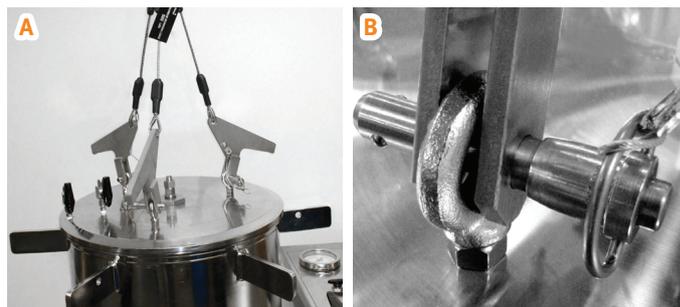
A: The pivot arms on the head sling assembly are attached to the eyebolts on the top head assembly. B: The quick-release pin locks the pivot arm to the head eyebolt.
